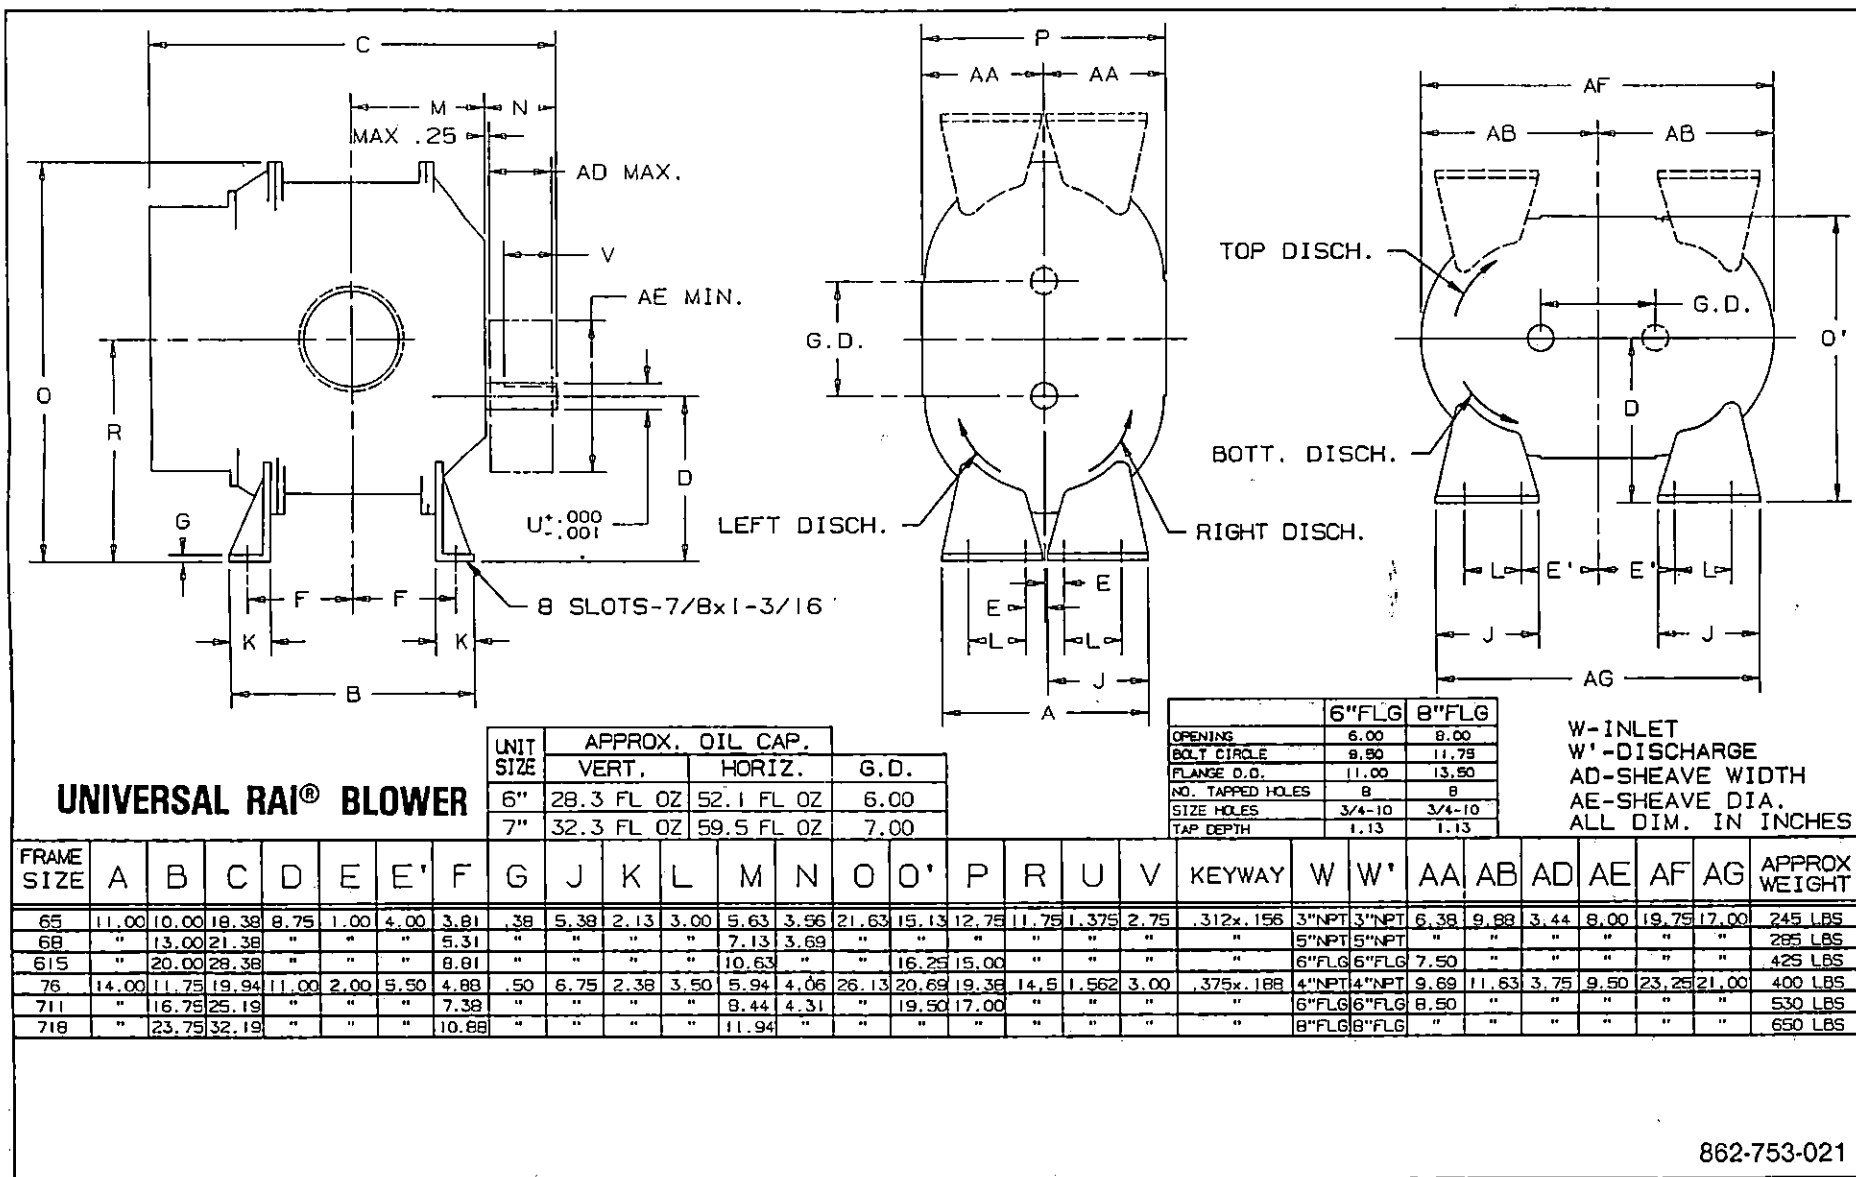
Assembly of UNIVERSAL RAI® Blowers, 6" and 7" Gear Diameter
